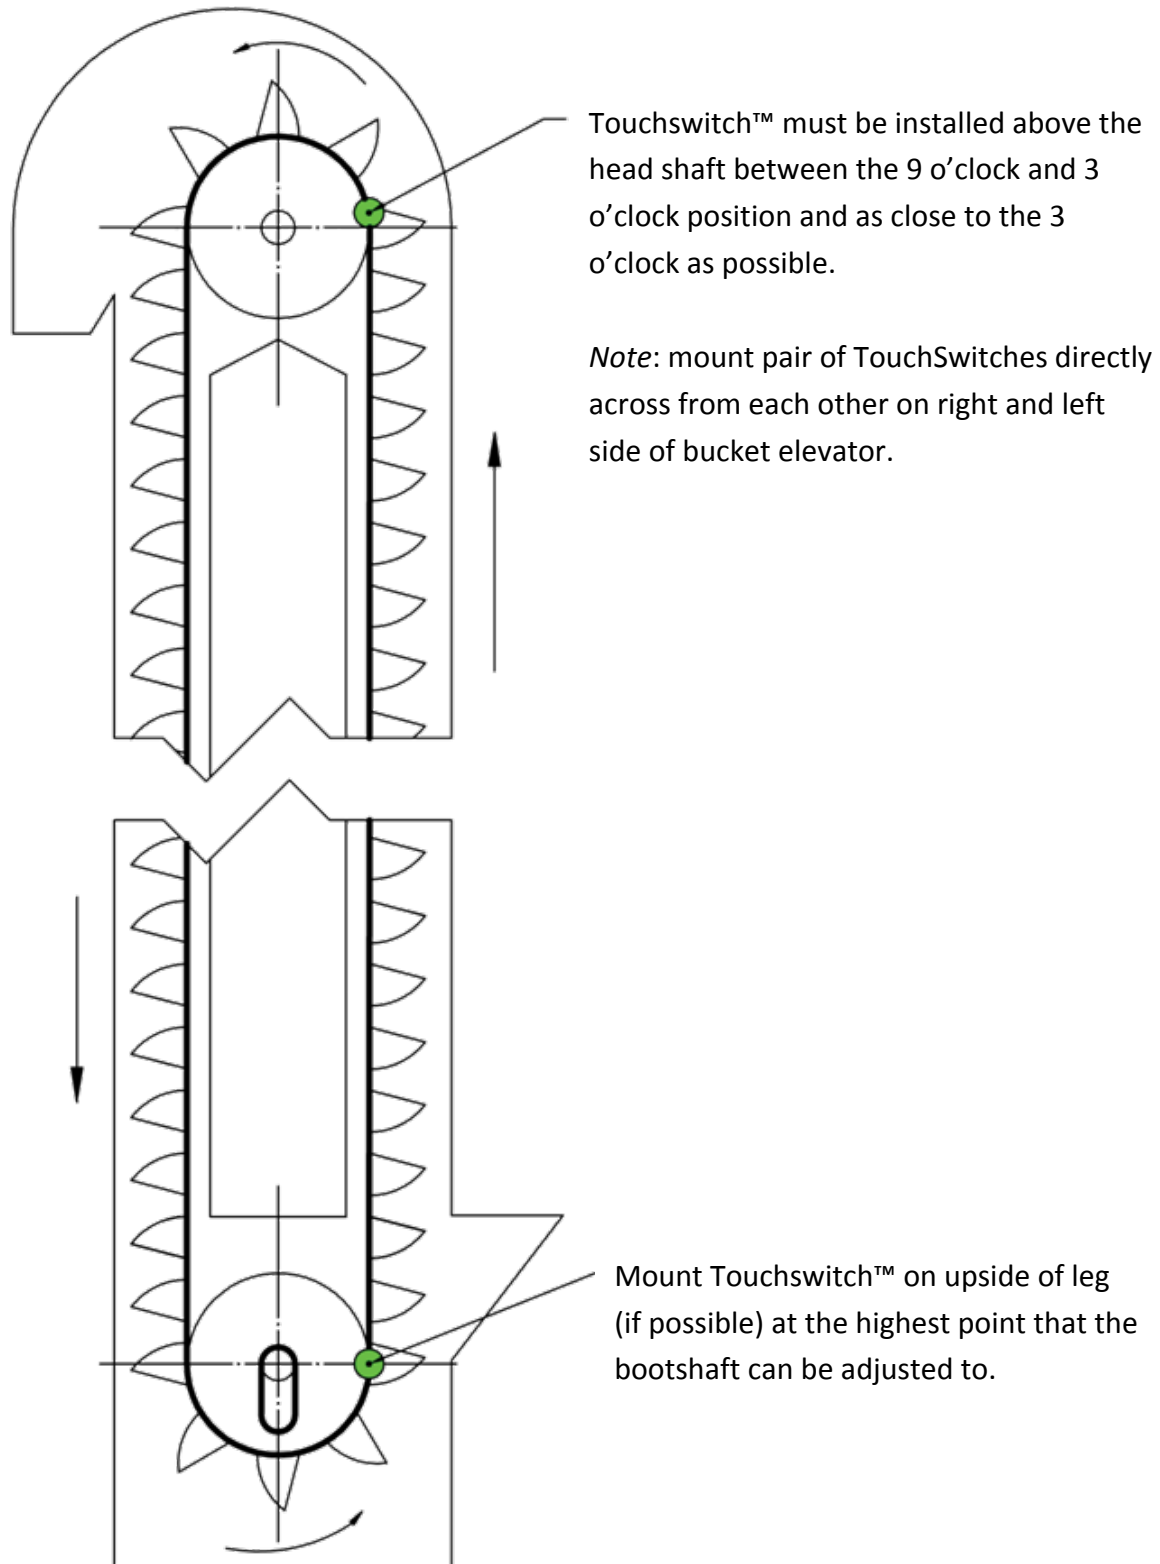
Touchswitch Mounting Positions – Elevator Leg
